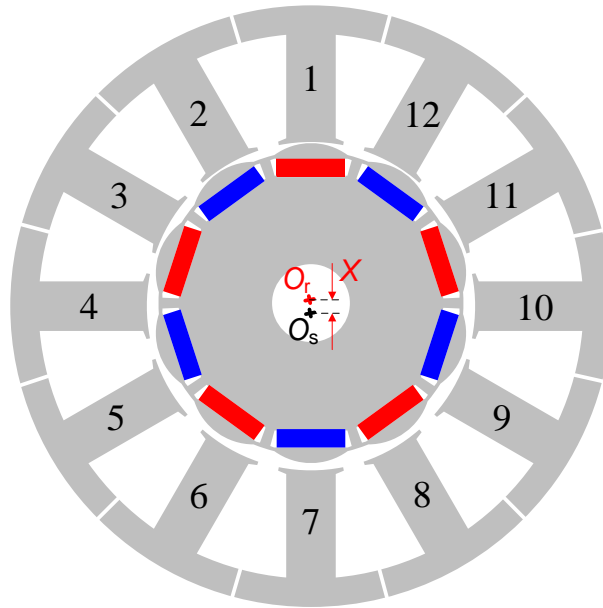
12-slot/10-pole PM machine with rotor eccentricities.
